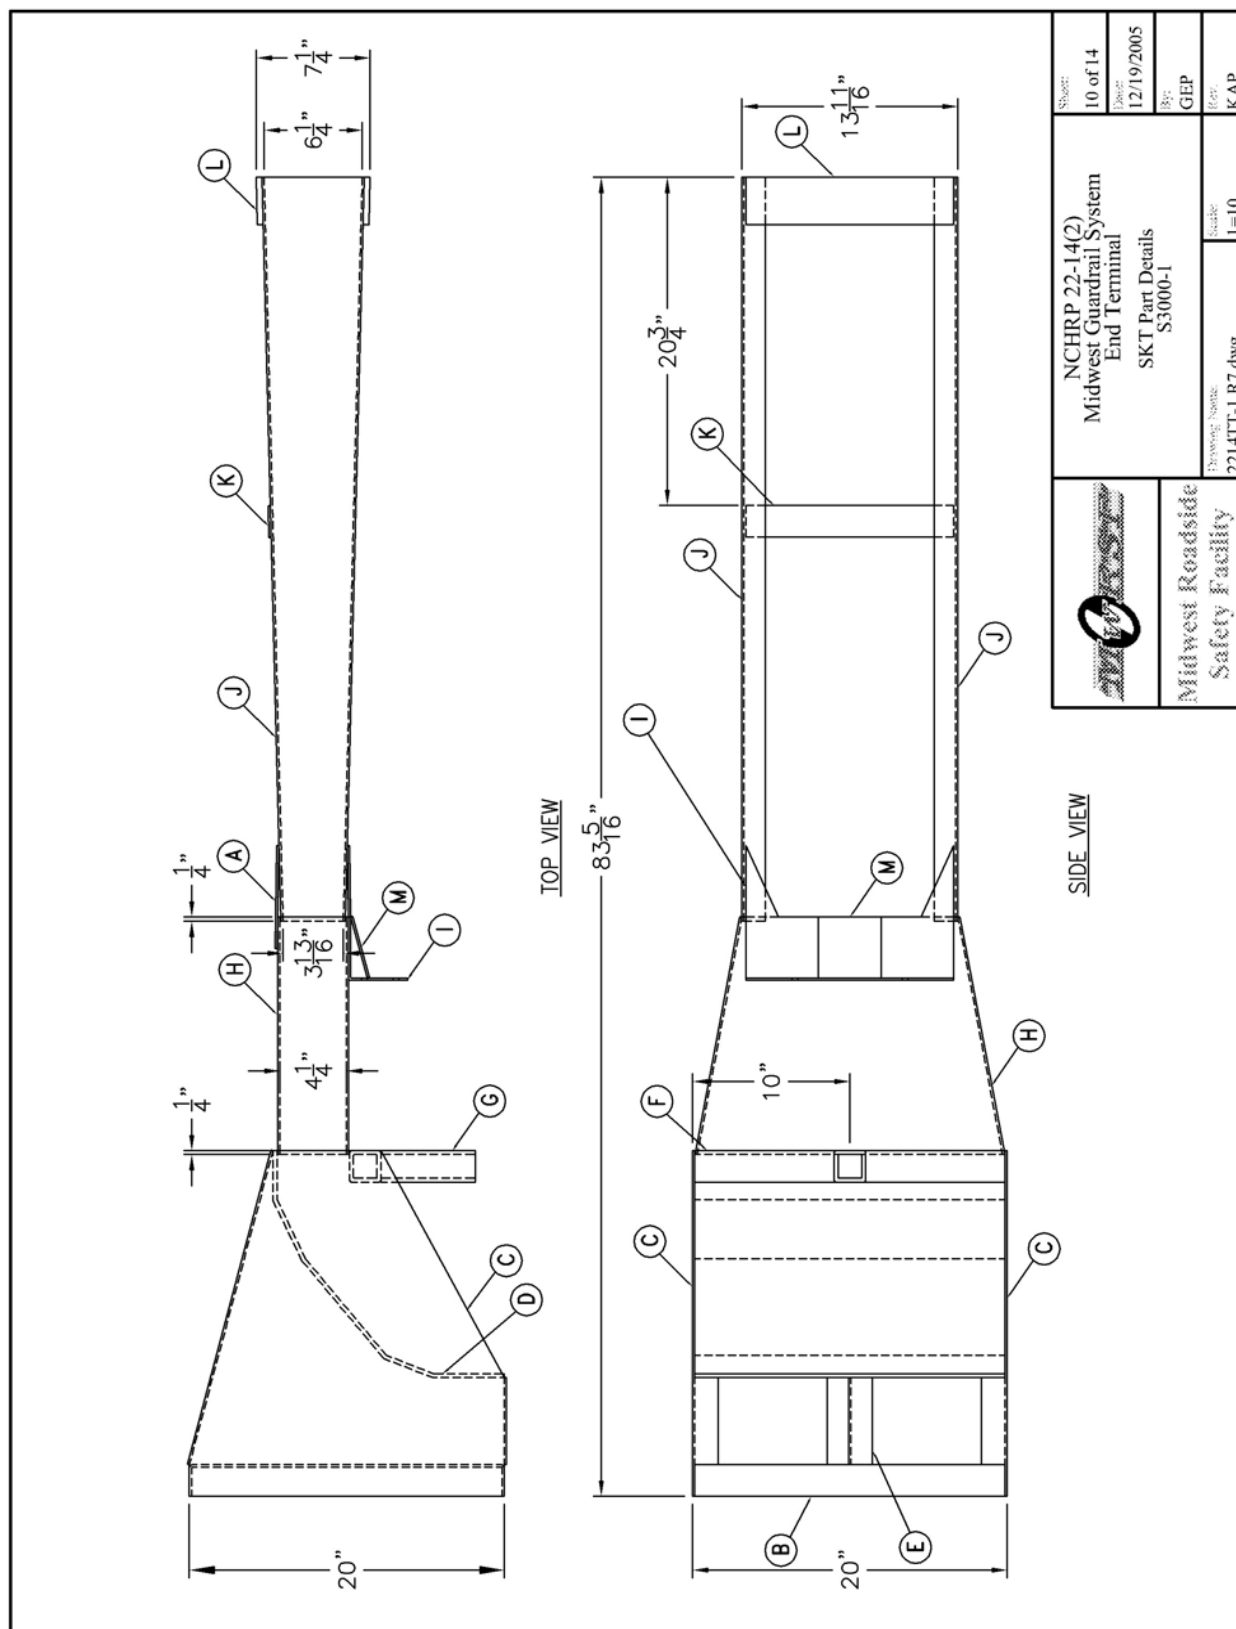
Midwest Guardrail System End Terminal - SKT Head Details (English)
